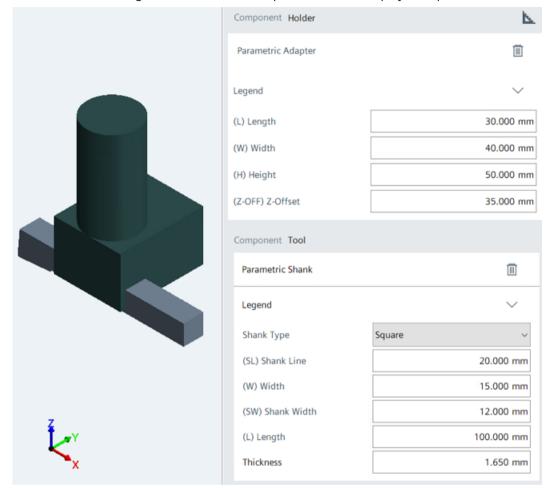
Defining a parametric adapter using a turning tool as an example
